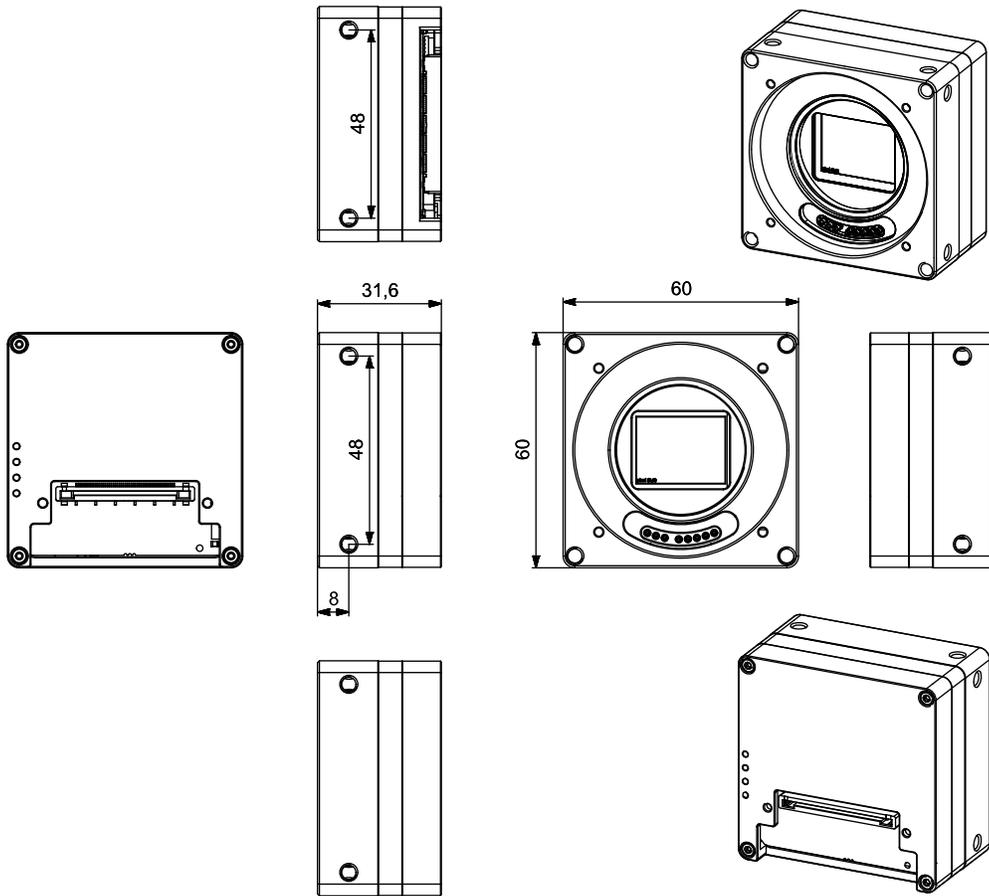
Dimensional drawing of MX120xG-CM-X4G2-FV
